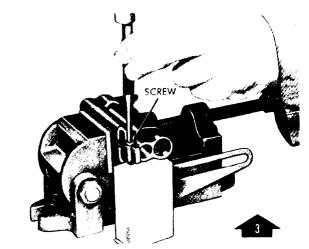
Disassembly/assembly of gas cylinder group. (1 of 2)
